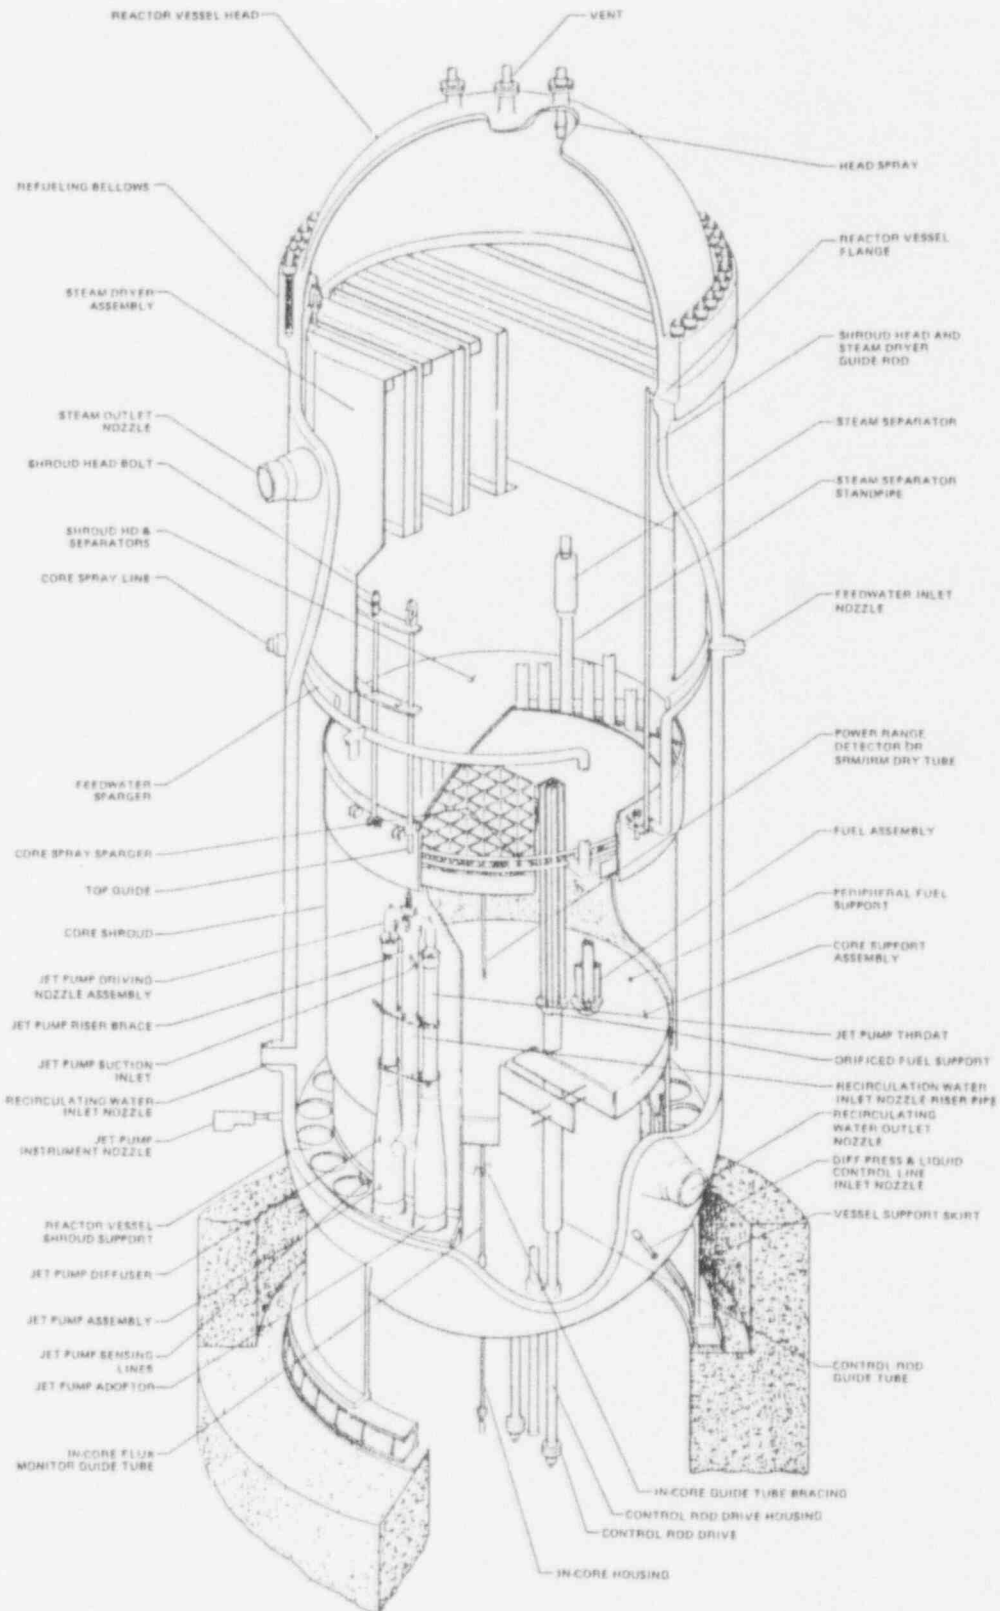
Arrangement of reactor vessel components in typical GE BWR/4, BWR/5, and BWR/6 plants.
